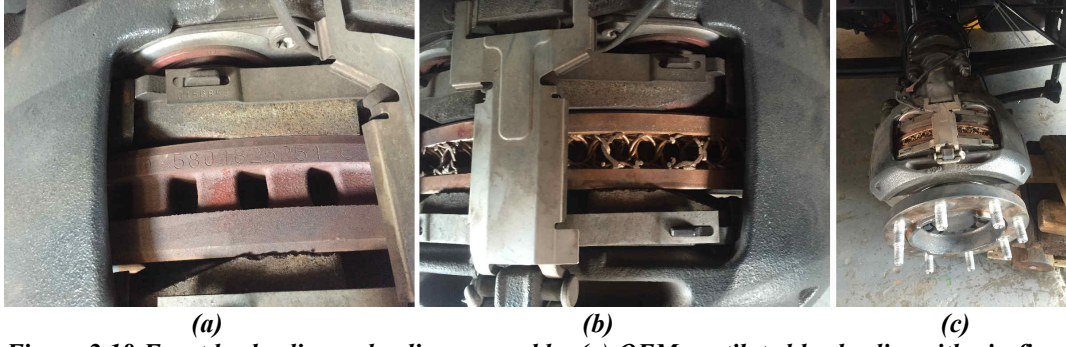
Front brake disc and caliper assembly; (a) OEM ventilated brake disc with pin fins, (b) highly porous WBD brake disc, (c) right front wheel hub assembly with a WBD brake disc fitted
